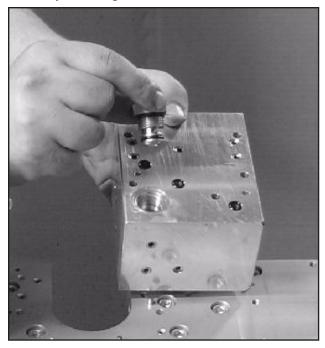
Use a 15/16" wrench or deep well socket to remove the bottom P.O. Check valve assembly from the Super V Valve Block Assembly.
